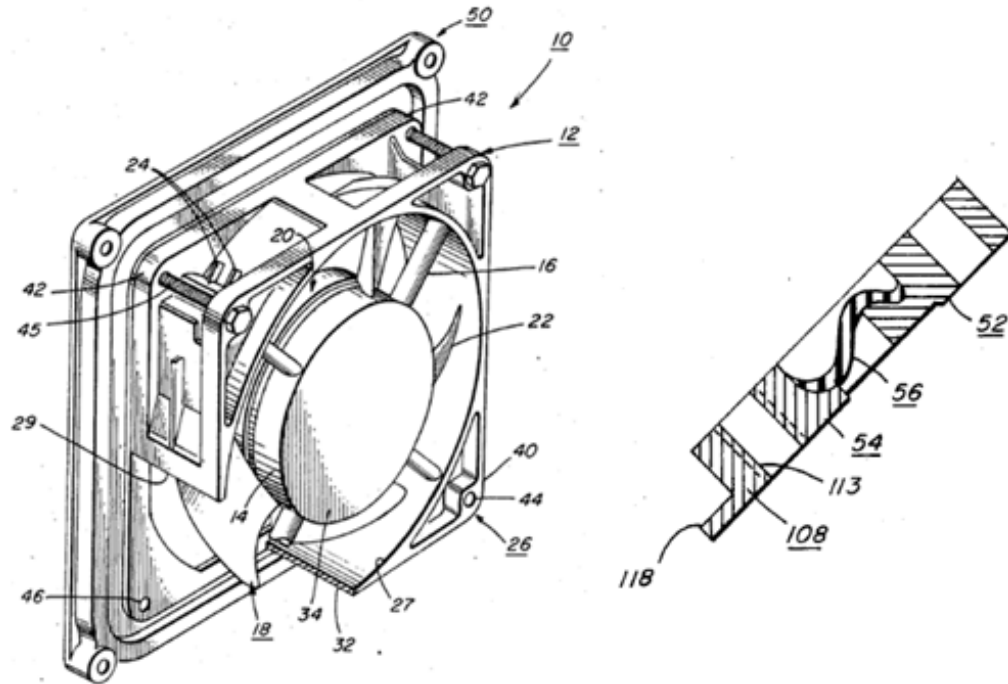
Schematic of a Base Mount Isolator Seal Design [20]
